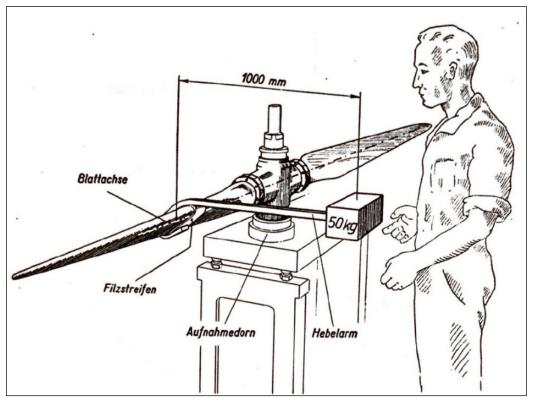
Adjusting the blade pitch on the measuring bench: Source: "*Junkers Metall-Luftschrauben*" (Junkers metal propellers).
